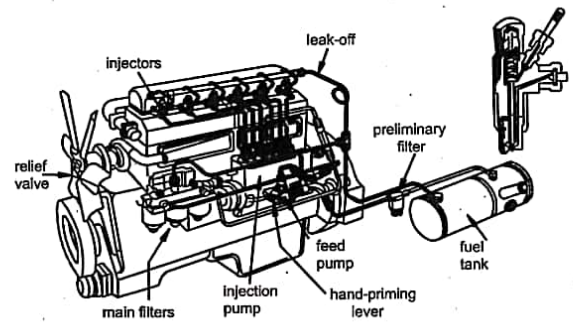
Fuel supply in a diesel engine (schematic).
